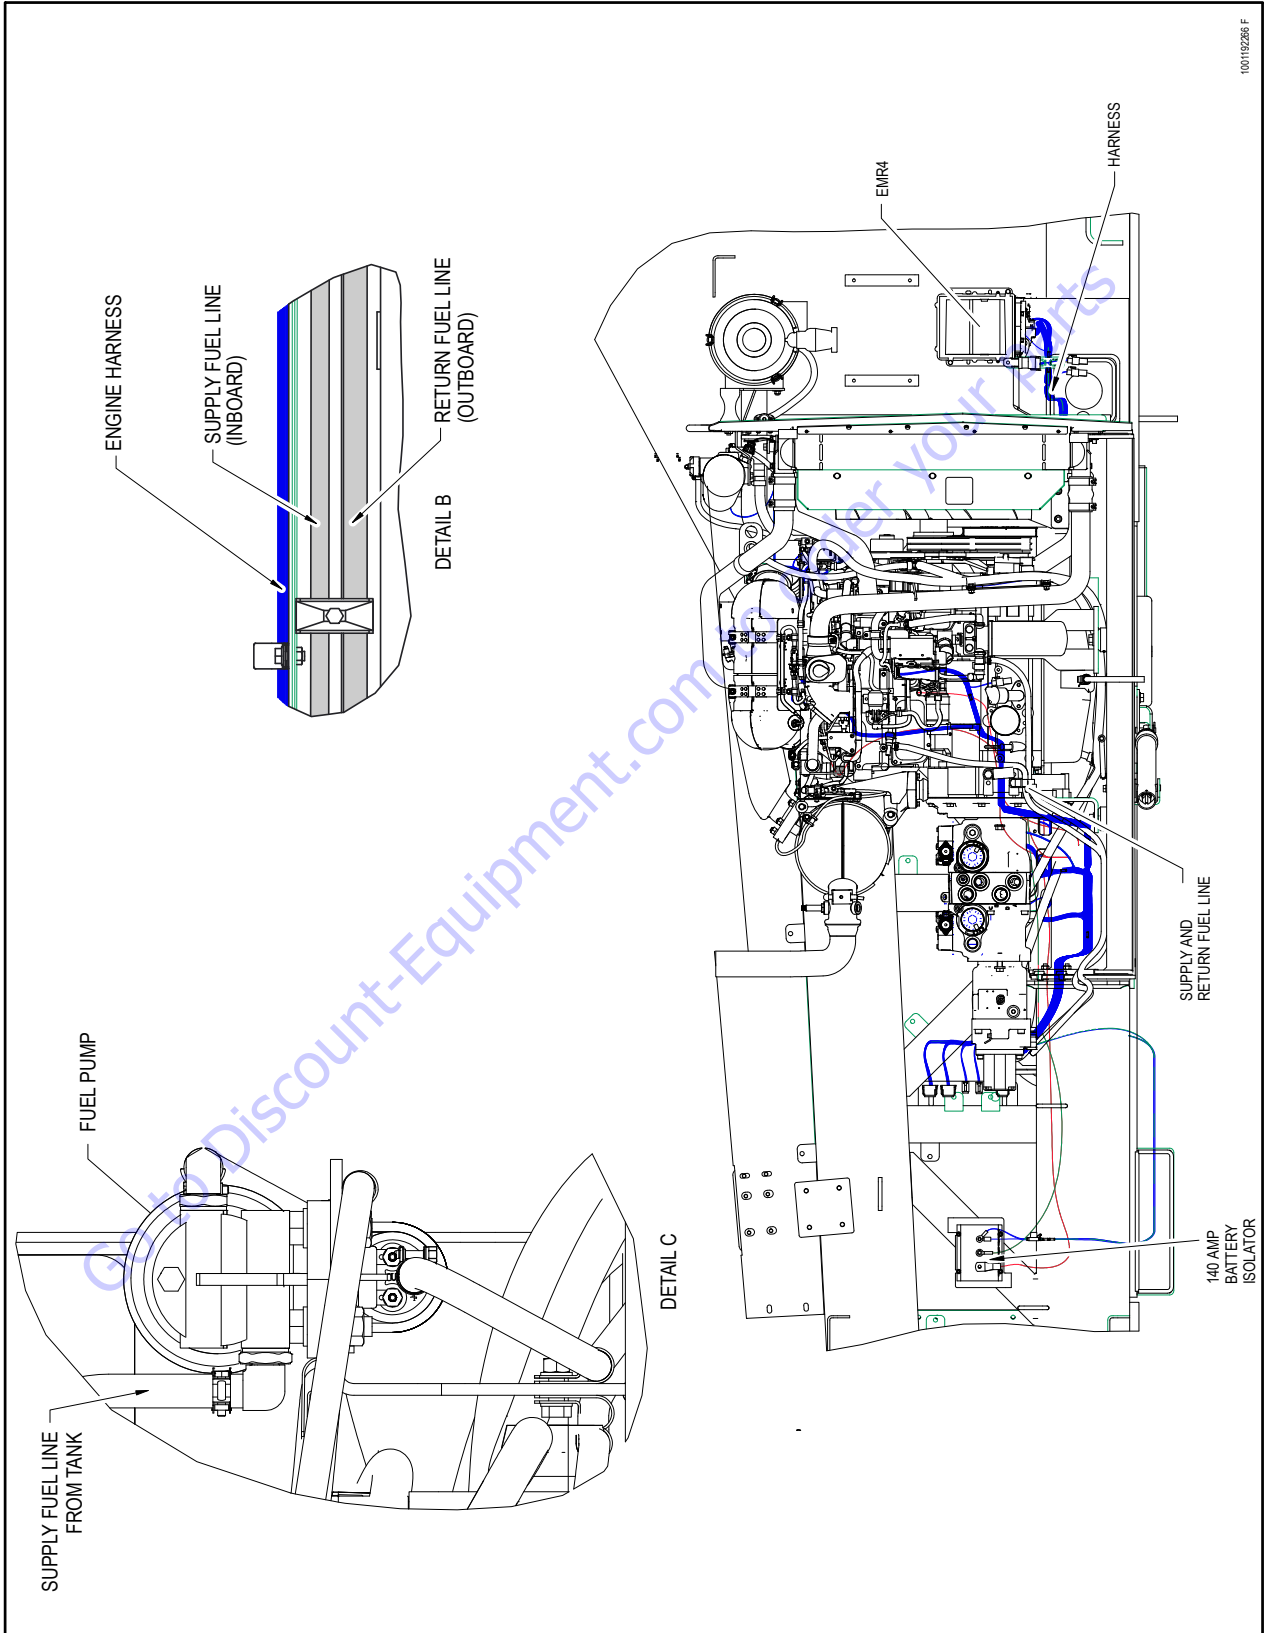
Engine Installation and Diesel Exhaust Fluid (DEF) System - Sheet 2 of 8
